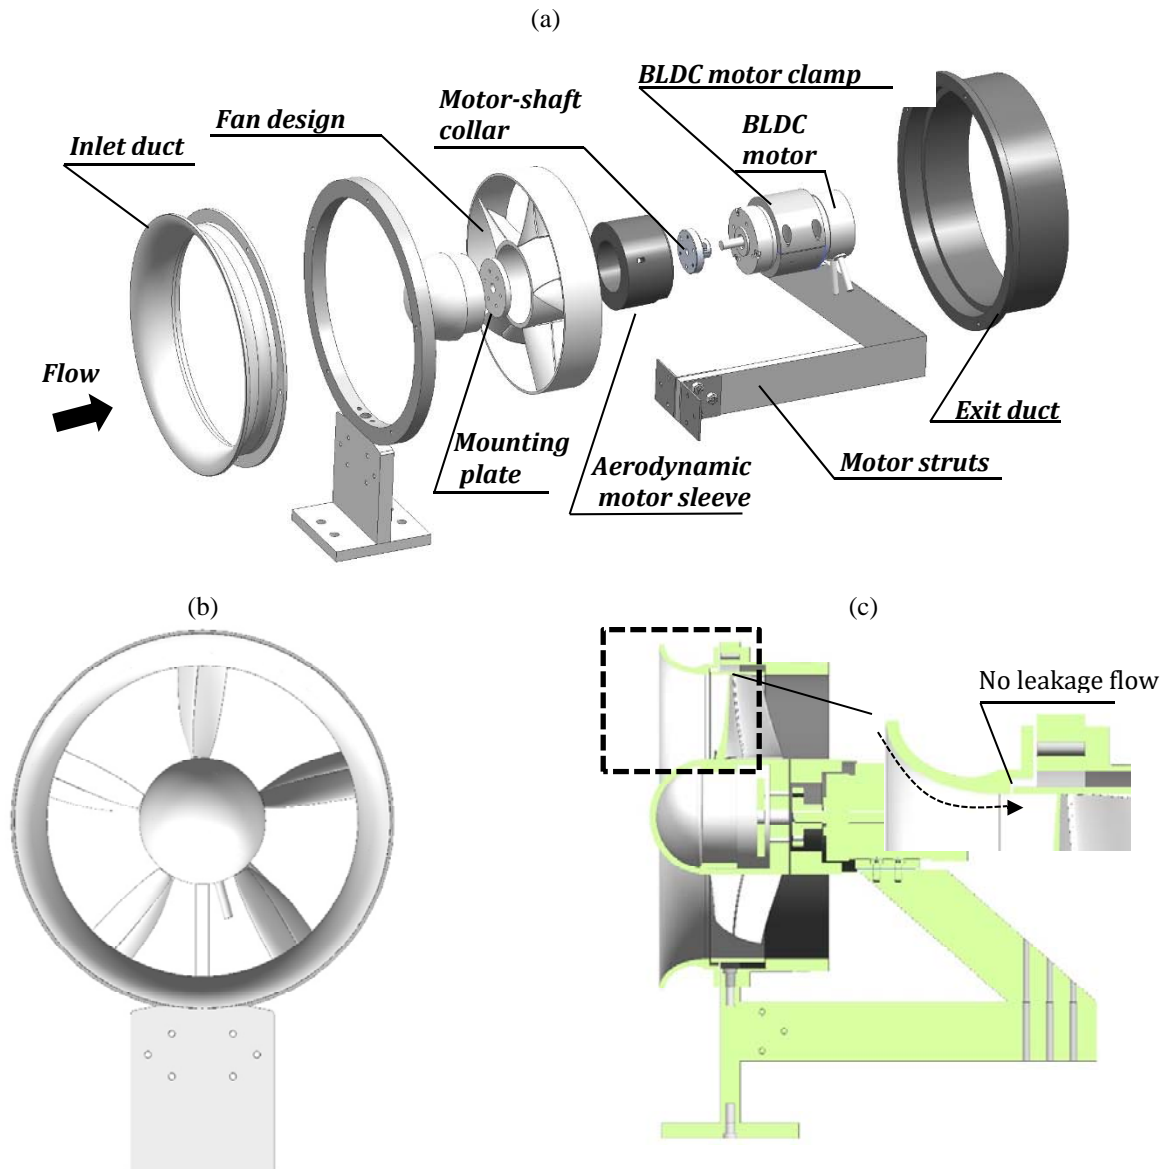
(a) Exploded, (b) side and (c) cross section views of the fan test rig.
